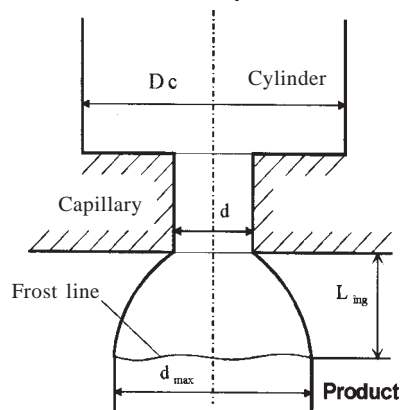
Definition of swelling: D_c - cylinder diameter; d - capillary diameter; d_{max} - maximum diameter of the extruded product; L_{ing} - distance to the "frost line"
